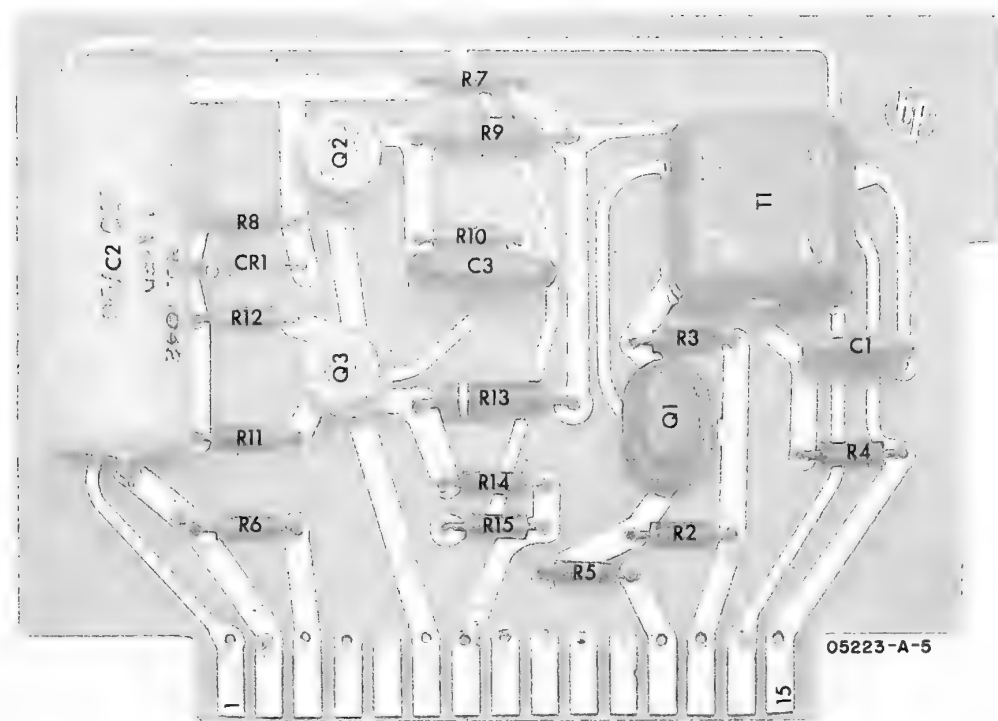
Amplifier Assembly A1 & Trigger Assembly A2
